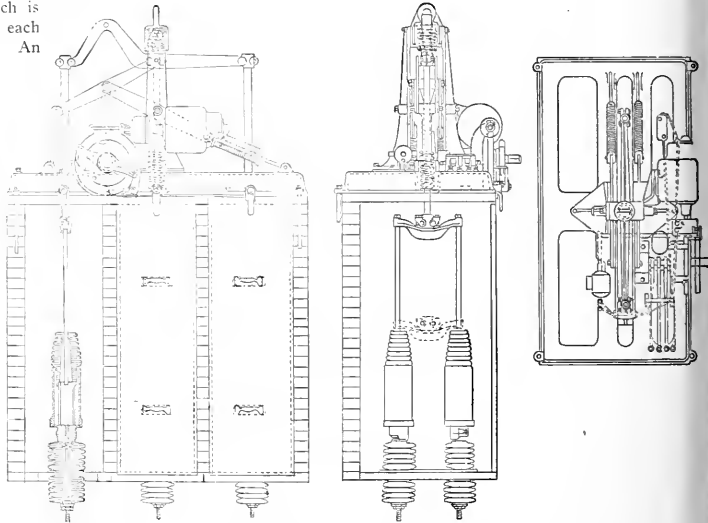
SECTIONS AND PLAN OF OIL SWITCH IN SCHENECTADY TERMINAL HOUSE.
